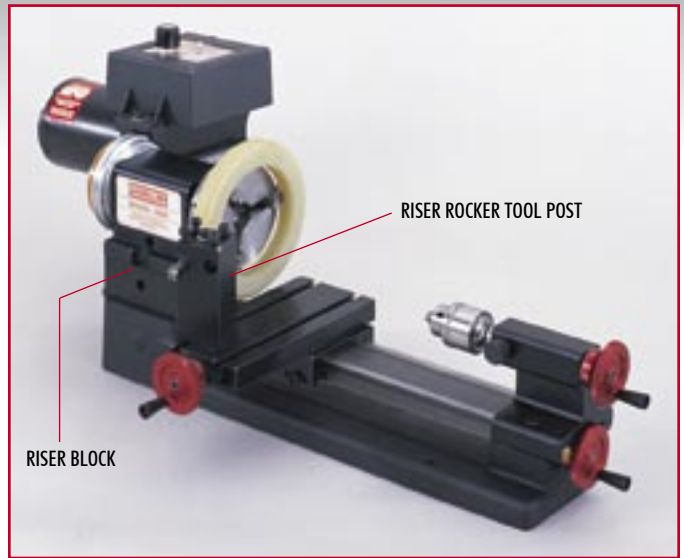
Larger parts up to 6" (152 mm) in diameter can be turned on the lathe using the riser block kit shown above. Parts over 4" (102 mm) in diameter can be turned between centers over the table.
